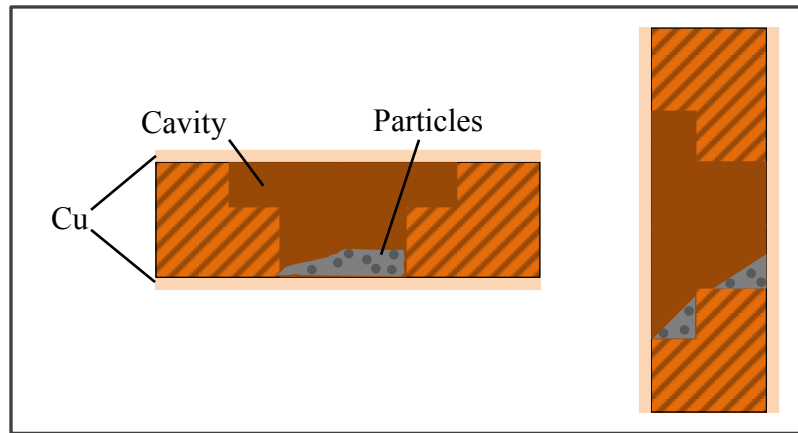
Schematic of two-step laser micro-machined cavity design; tipped on its side (*right*).
